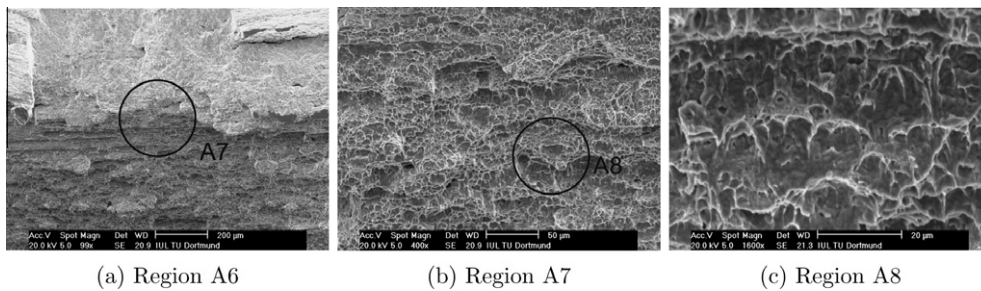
SEM fractographs from fracture surfaces, Part III.
